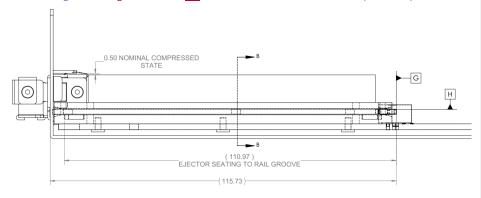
Large Form FactorLFF Baseboard Chassis CTF Dimensions (Rail Guide View)
